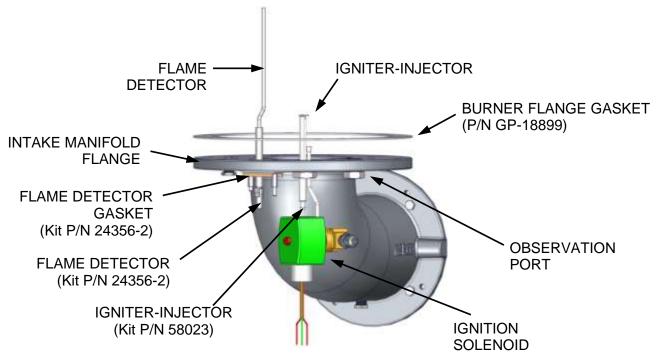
Intake Manifold with Igniter-Injector & Flame Detector
